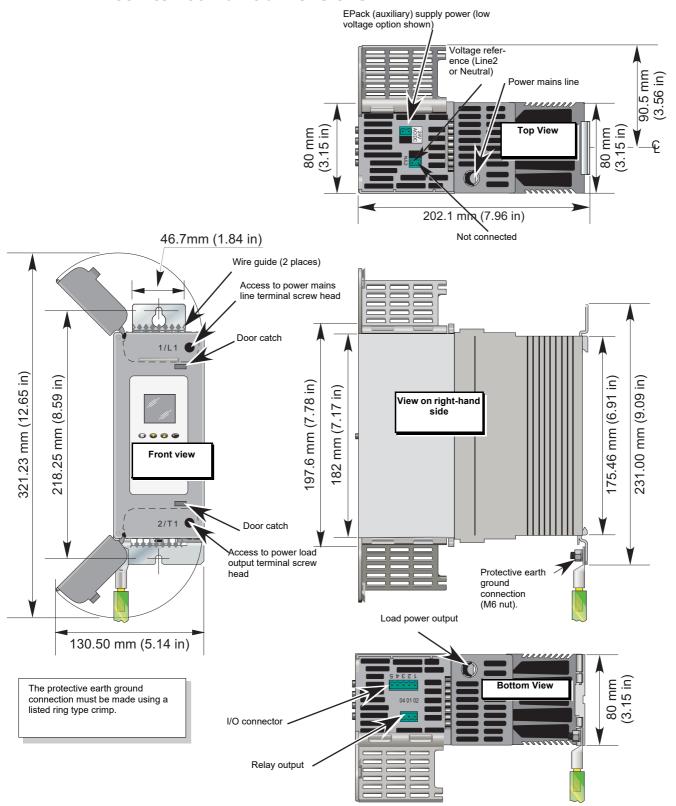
Mechanical installation details (80A to 100A units) (doors open).
